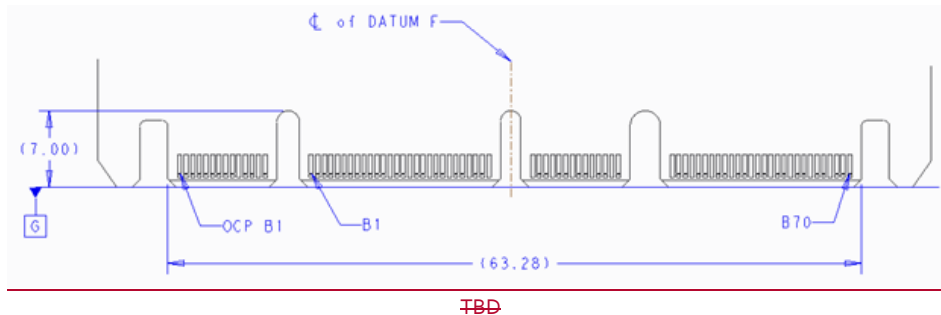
Small Size Primary Connector Gold Finger Mating Card Dimensions – x16 – Bottom Side (“A” Pins)
